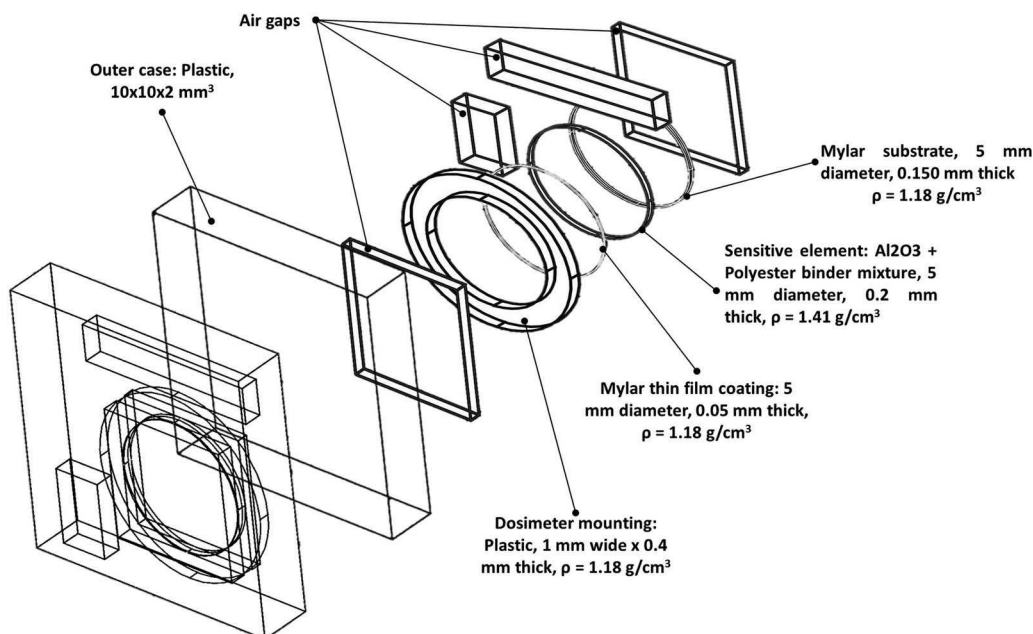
Details of the geometry used for Monte Carlo simulations (export from GEANT4): wireframe (lower left) and exploded view. The exploded view shows the components of the dosimeter with dimensions, materials, and densities.
